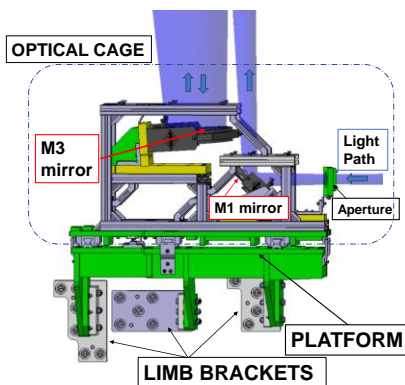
Diagram of WAV-M1&M3 assembly showing the light path.
